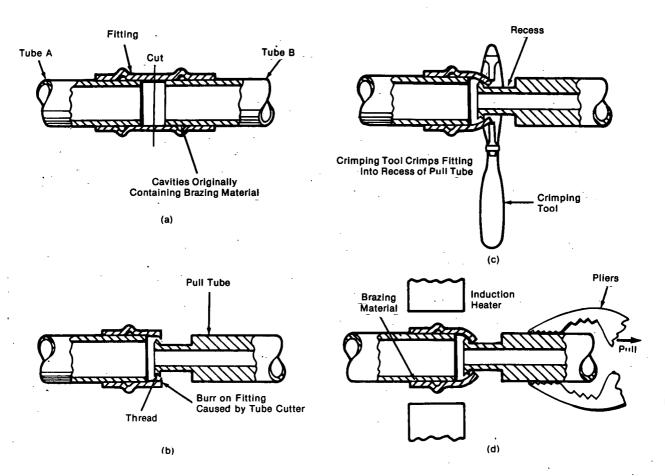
Fitting Removal Procedure: (a) Cutting, (b) Pull Tube Insertion, (c) Crimping, and (d) Fitting Removal
